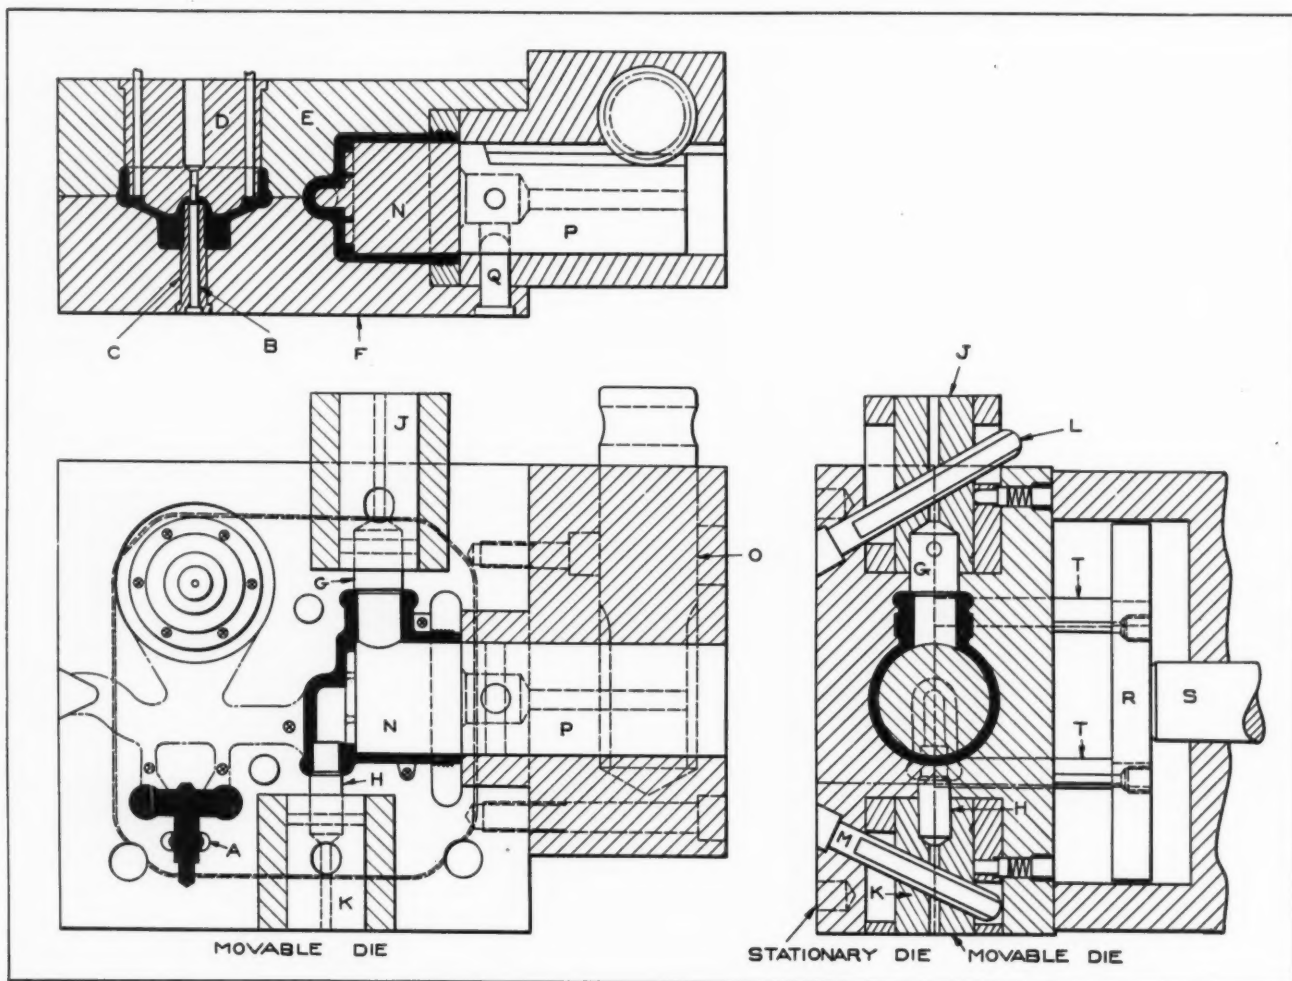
Details of Construction of Dies Shown in Fig. 6
